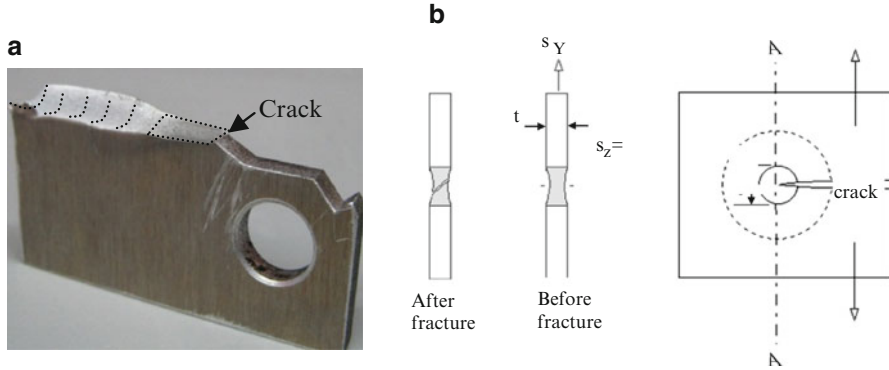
(a) Part of the specimen after fatigue failure. (b) Plane stress fracture
